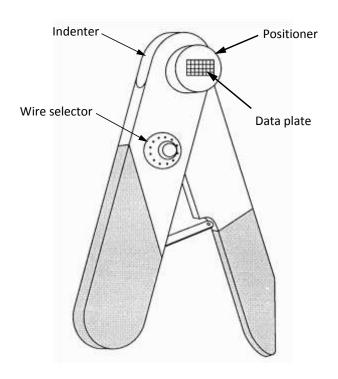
M22520/2-01 Hand Activated Crimp Tool
